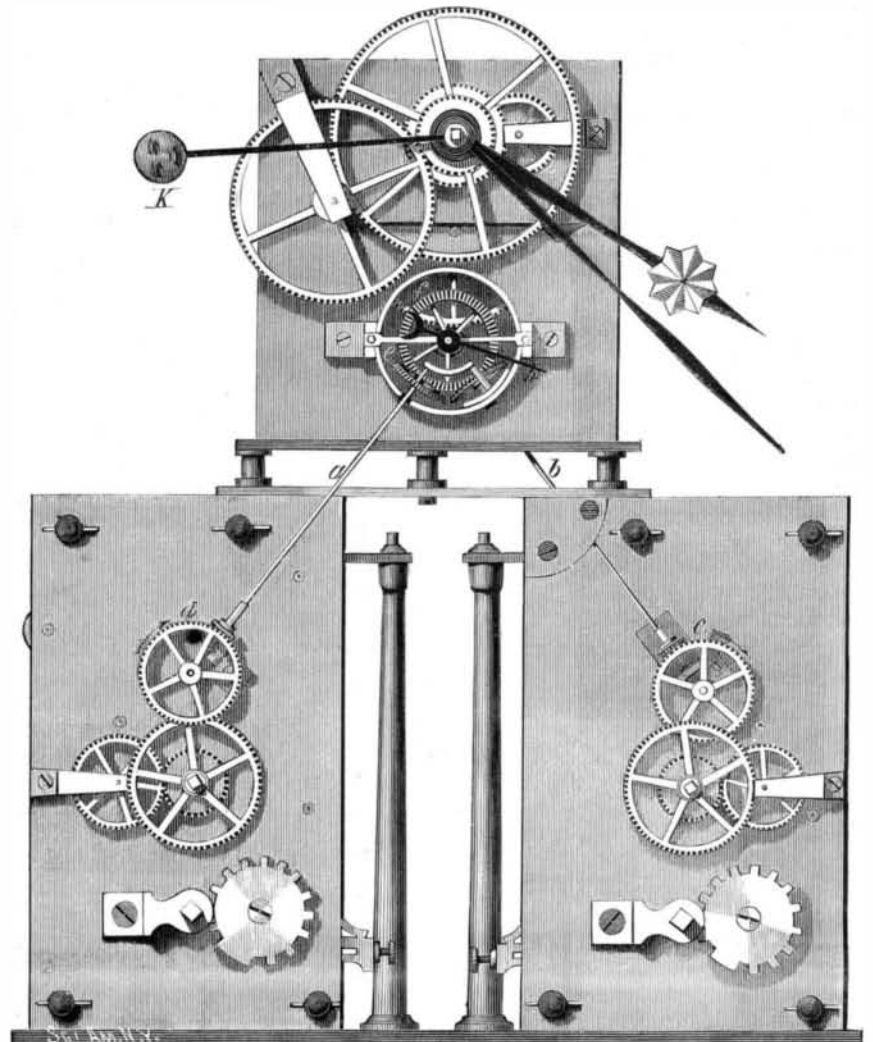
VIEW OF WORKS WITH DIALS REMOVED.
